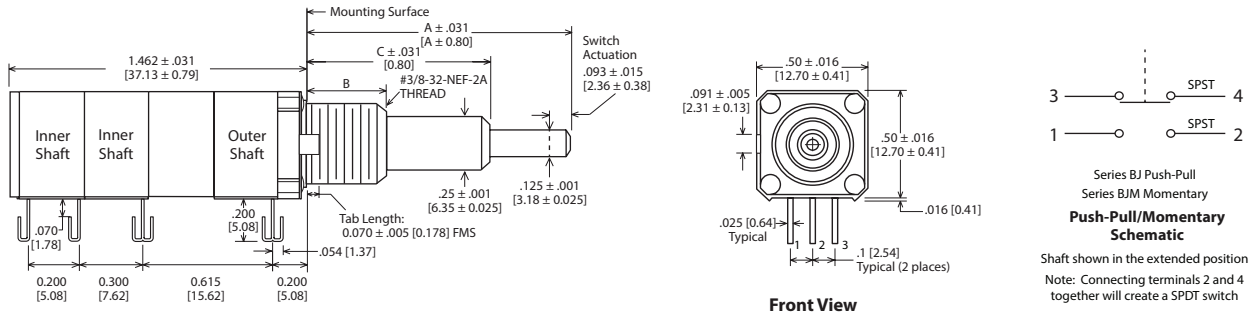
SHA21: Concentric Shafts, Solder Hooks, 2 Potentiometer(s) or RS + MP, 1/4" Bushing
